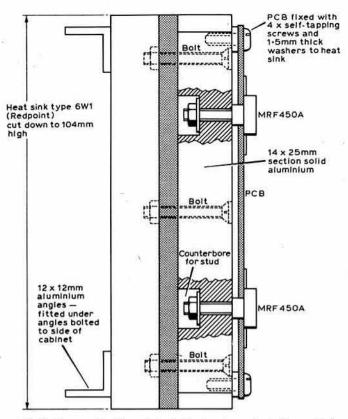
Cross-section through heatsink showing method of mounting transistors. Use heatsink compound between all metal parts
